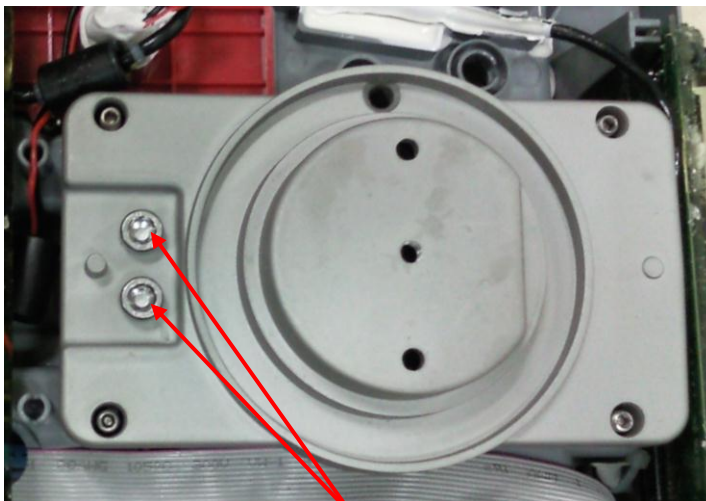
Remove the bolts holding Frame to the Load Cell.
